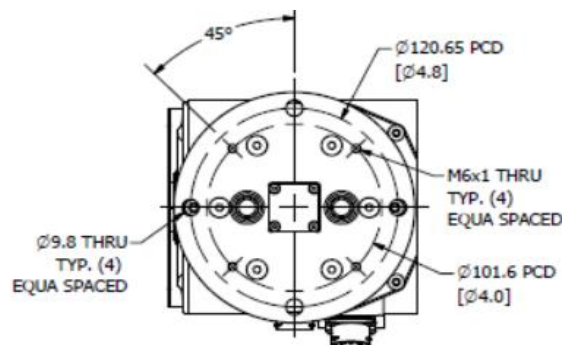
Product Mounting Hole Pattern (See Section 6.2 for Enlarged version)
